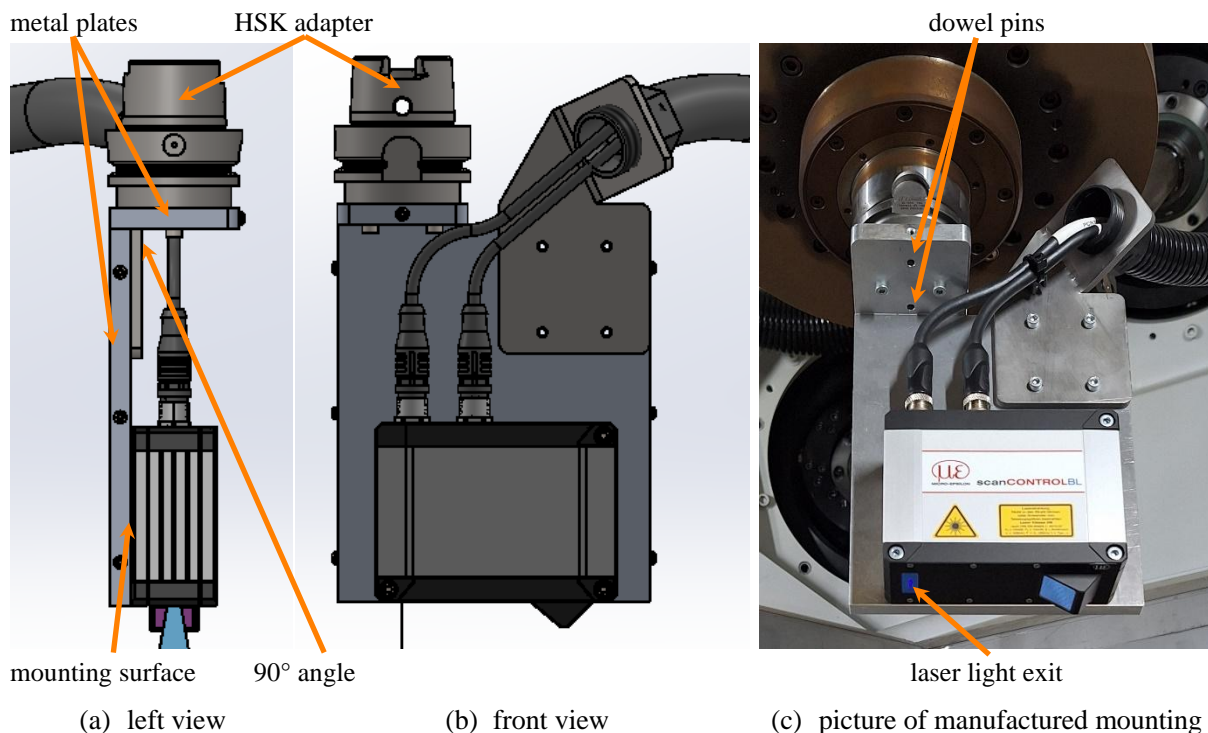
Two screenshots of the CAD model and an image of the laser scanner mounting illustrate possible manufacturing and assembly tolerances, which may lead to a slight offset between the two laser scanner frames S_0 and S
